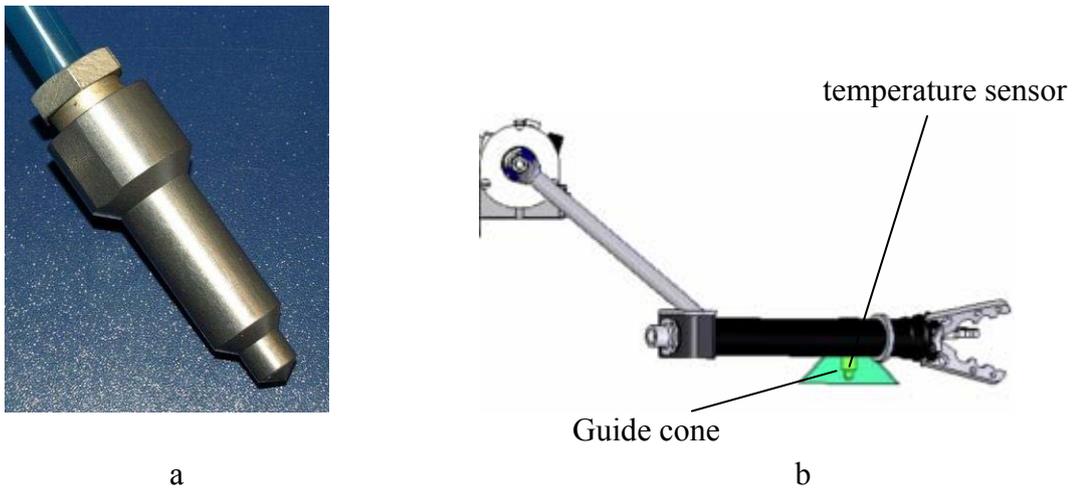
The temperature sensor: a) photograph; b) placement on the manipulator
